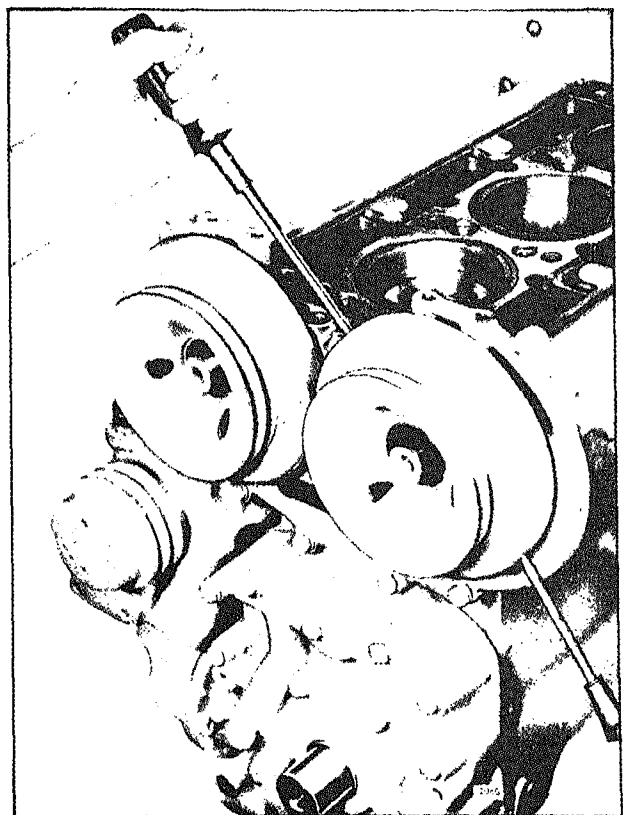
Removing Front Balance Weight (Pulley Type)
